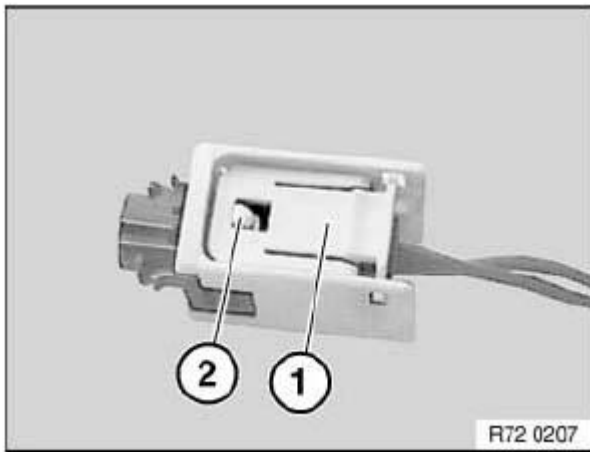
Identifying Locking/Unlocking Plate And Lug
